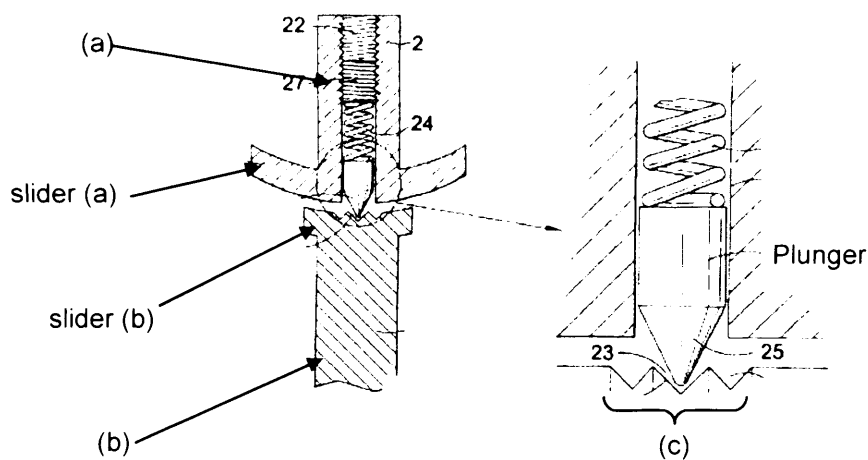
A drawing of the way in which the spring plunger prevents and allows motion in the lateral loading restrictor. Adapted from patent WO 0405530.
